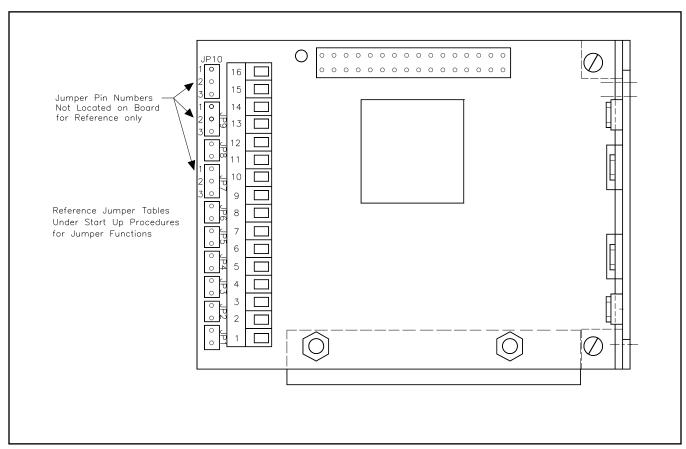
Jumper Locations (Revision 2 Artwork and Lower PC Boards)
